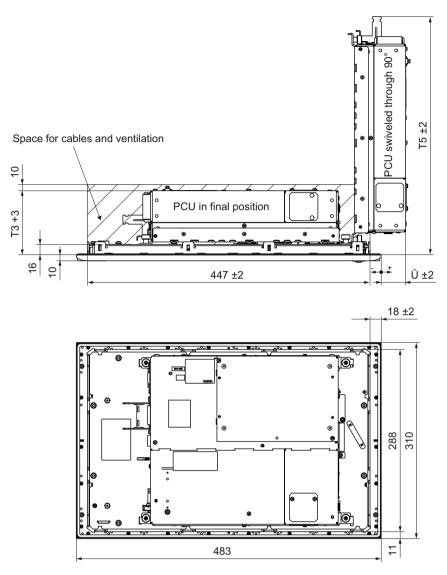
Dimension sheet for mounting the OP 010C with PCU
